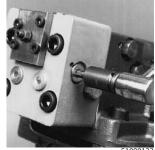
Torque Shuttle Spool Plugs
